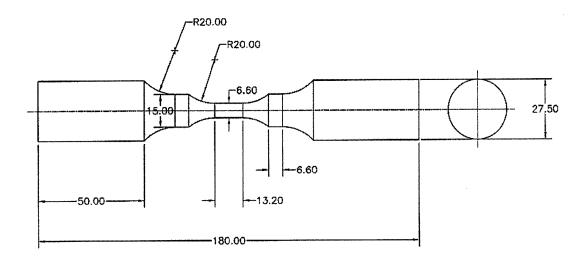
Diagram showing test piece dimensions in mm, general tolerance ±0.05mm
